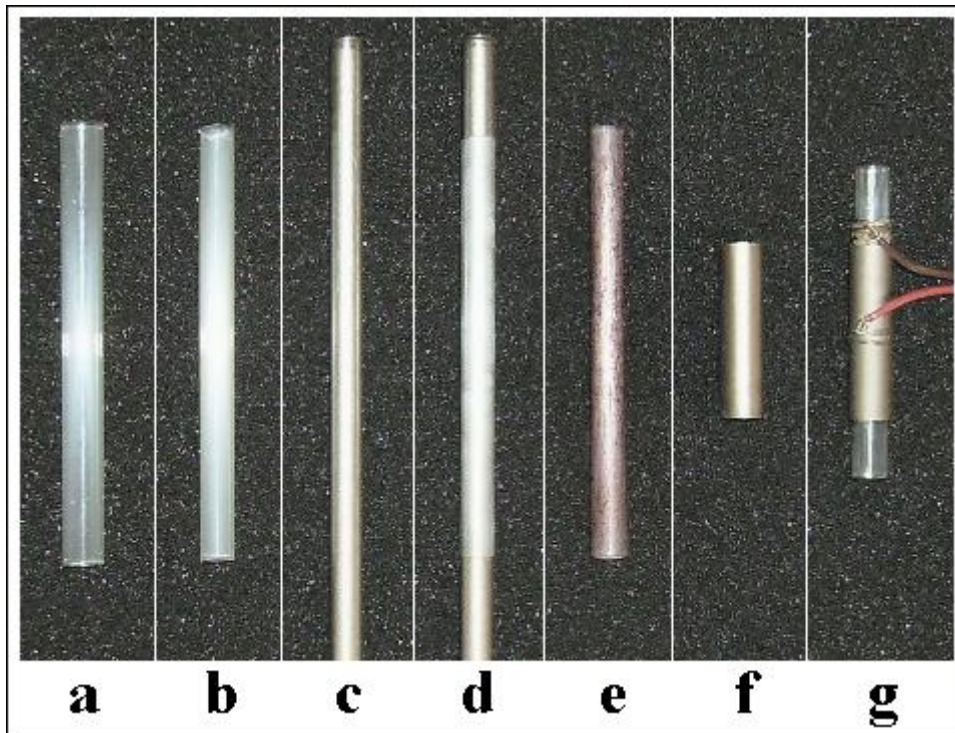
Schematic showing the fabrication of the printhead chamber: (a) PET tube before shrink. (b) Teflon tube before etching. (c) The steel tube used as a mould during heating of PET. (d) PET tube after shrink. (e) Teflon tube after etching. (f) Piezoelectric tube. (g) Shrunken PET tube bonded to the piezoelectric tube.
